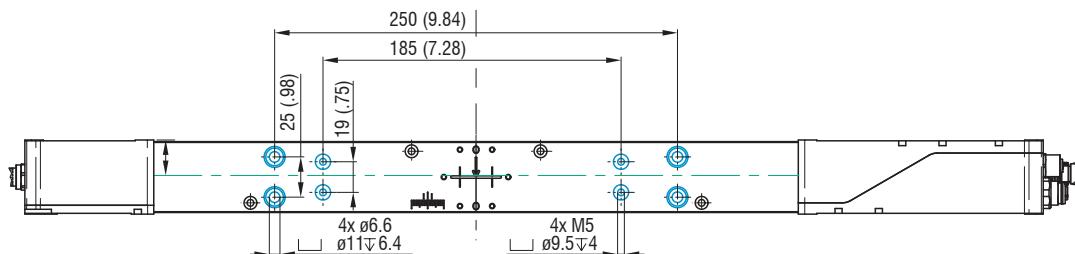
Dimensional drawing of mounting rail ODC2700-40(002), optional mounting
